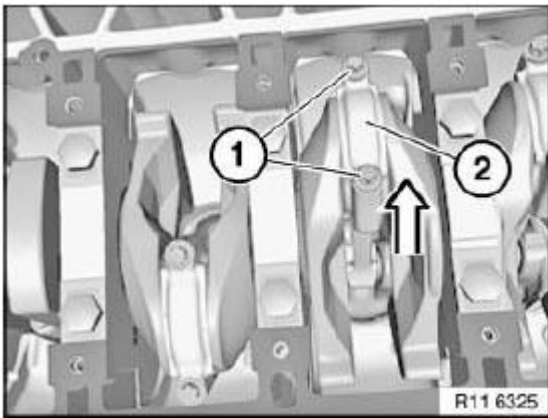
Identifying Connecting Rod Bolts And Connecting Rod Bearing Cap
